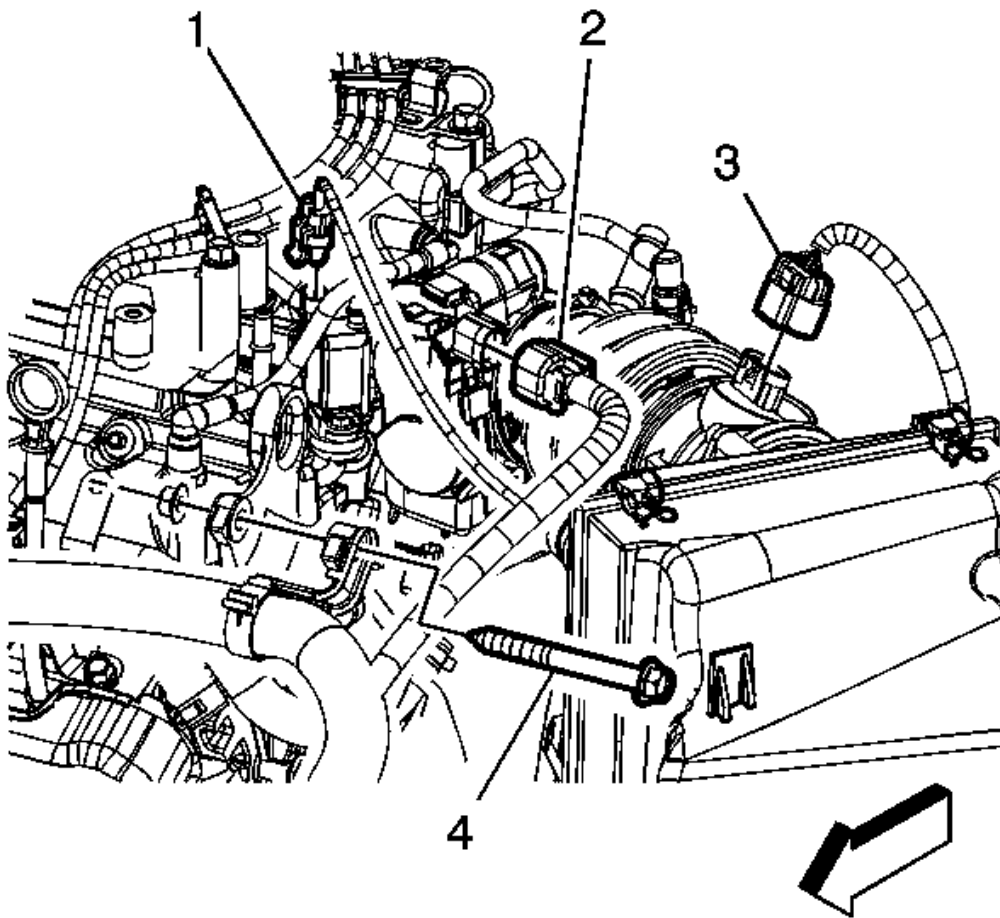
View Of EVAP Canister Purge Solenoid Electrical Connector
